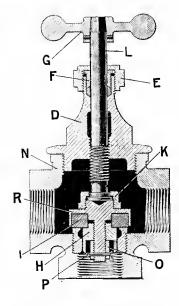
1 in. Cross Graduating Valve No. 603c.
